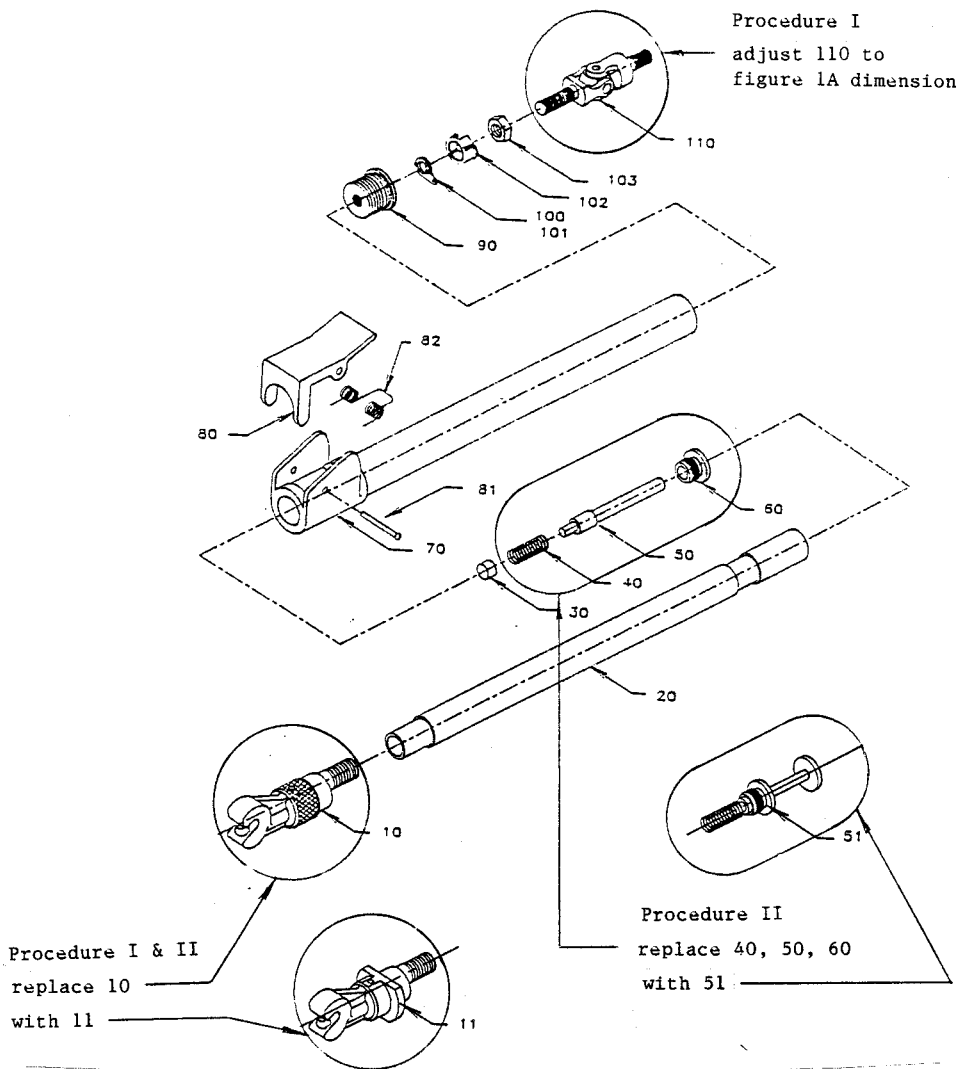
STRUT ASSEMBLY MODIFICATION
